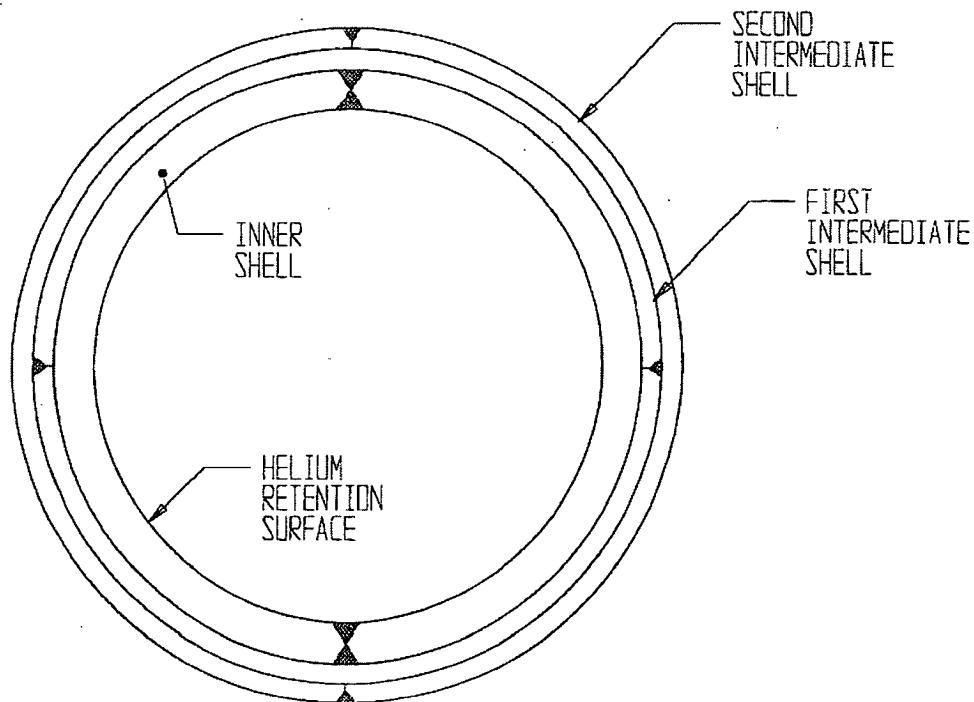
; CROSS SECTION ELEVATION VIEW OF OVERPACK
